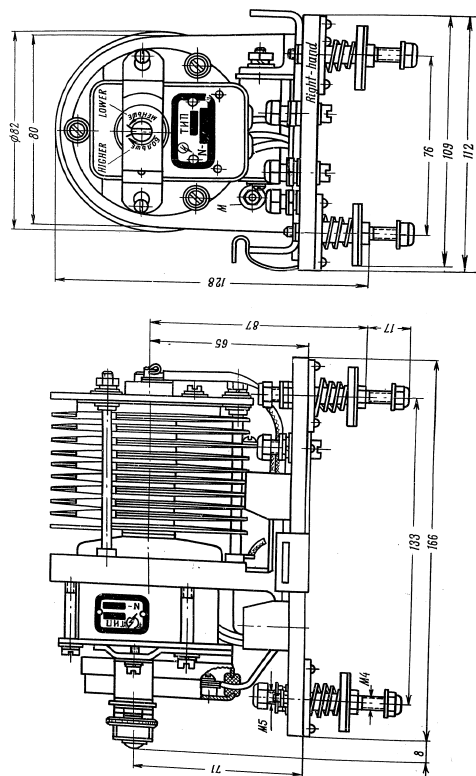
Overall Dimensions of P-27 Regulator with Shock Absorbing Panel (right-hand)
